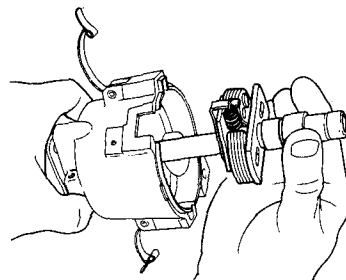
Removing rotor shaft and drive shaft assembly
